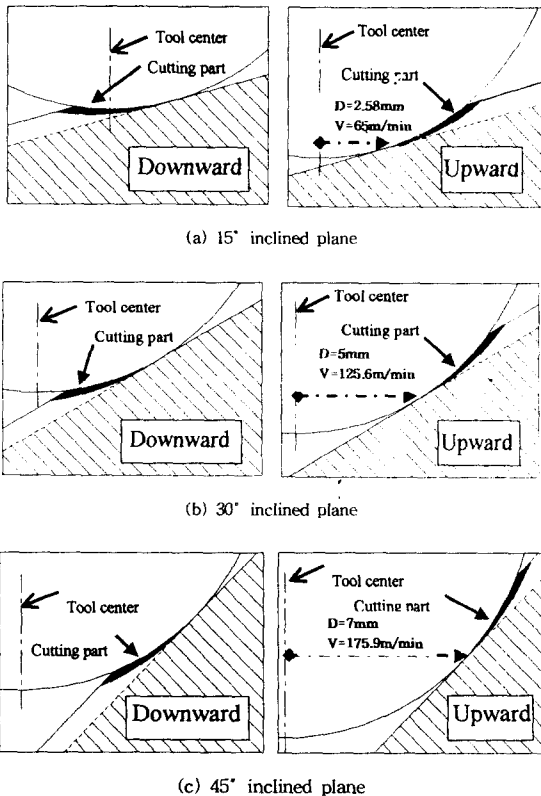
Comparison of cutting part and cutting speed in ball-end mill tool according to tool path(d=0.4mm)
